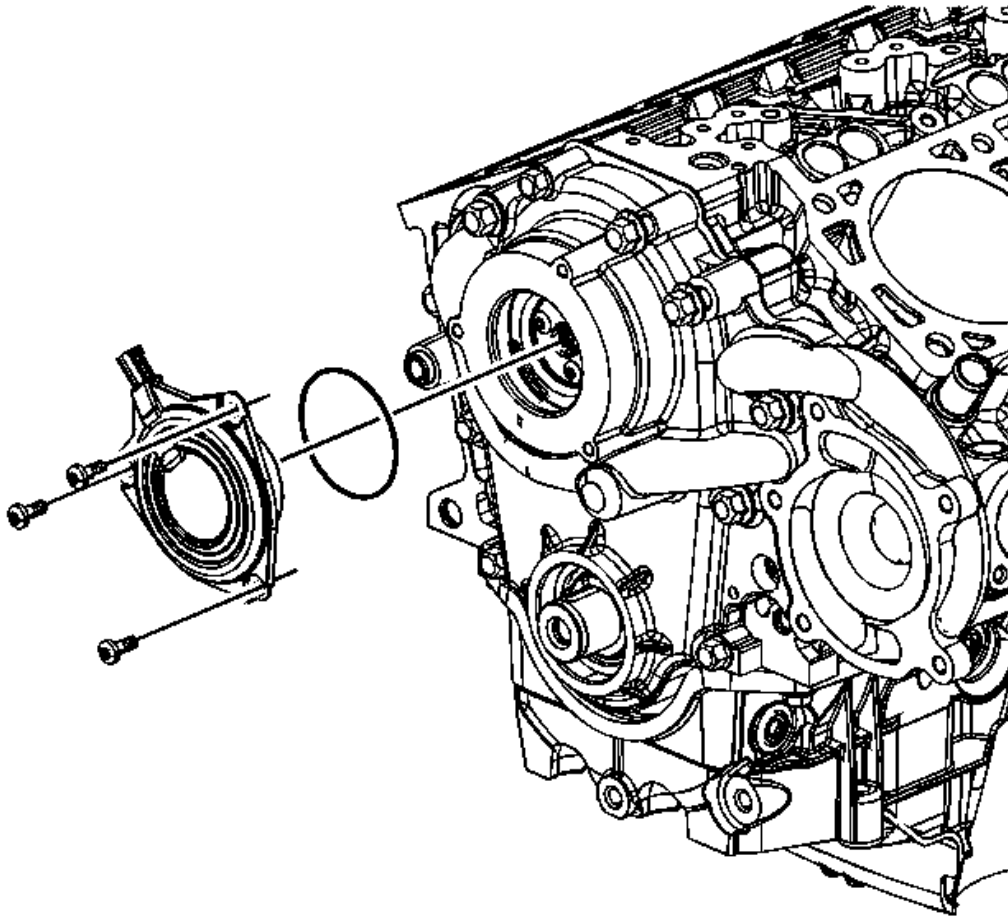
Identifying Camshaft Position Actuator Magnet & Bolts
